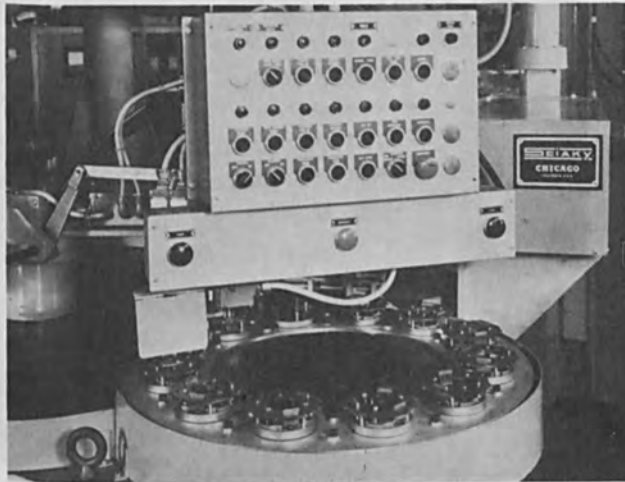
12-Station Auxiliary Loading Table to Serve (6-Station) Main Welding Table.
